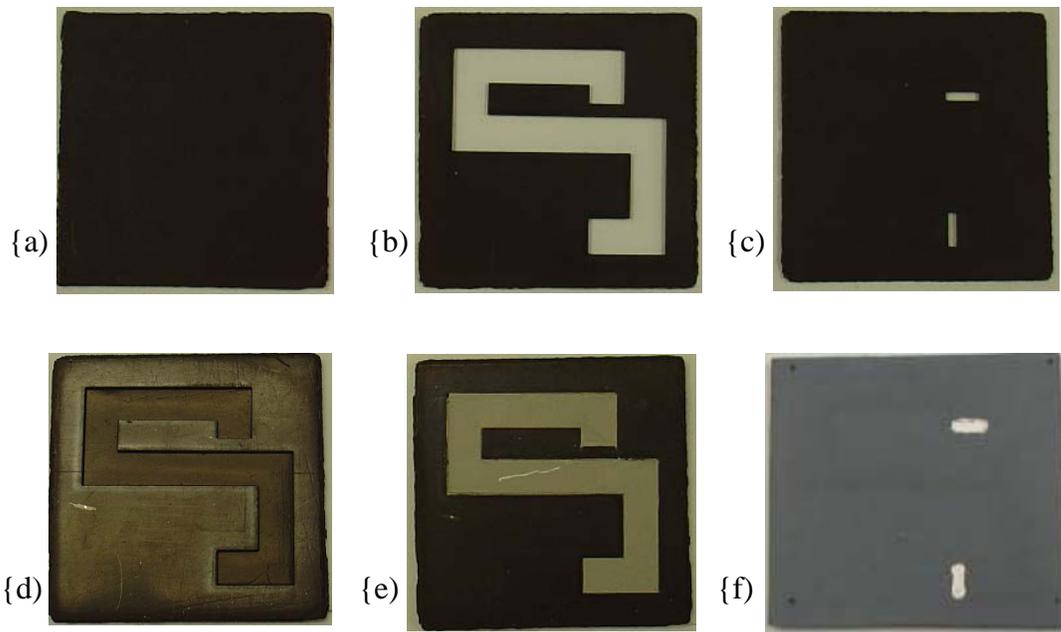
Fabrication procedure of inductor substrate. (a) Bottom main layer comprising 7 layers of ferrite tape, (b) Middle main layer comprising 8 layers of ferrite tape. An S-shape slot is cut using laser machining. (c) Top main layer comprising 7 layers of ferrite tape. Two rectangular slots for inductor's electrode cut using laser machining, (d) Laminate (a) with (b), (e) Ag/Pt paste is dispensed into the slot as described in Fig. 4-5. (f) Laminate (c) with (e), fill rectangular slots with Ag/Pt paste and sinter.
